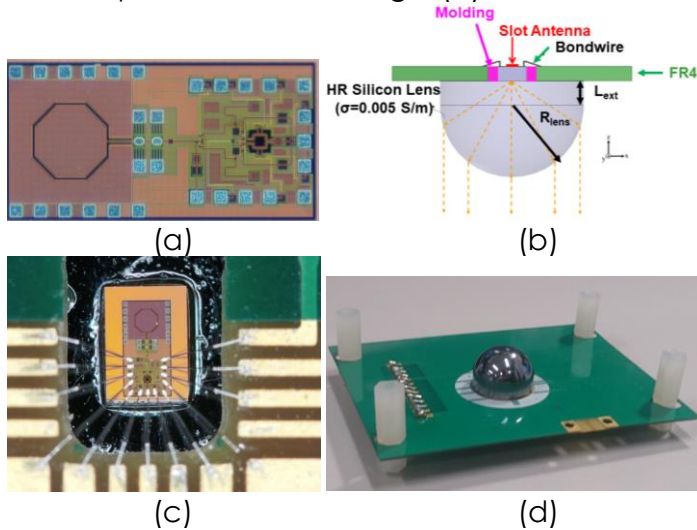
(a) Die photo (size: $0.67 \times 1.36 \text{ mm}^2$), (b) cross section of final assembly, (c) chip side photo after bondwire and (d) Si lens side photo after assemble.
